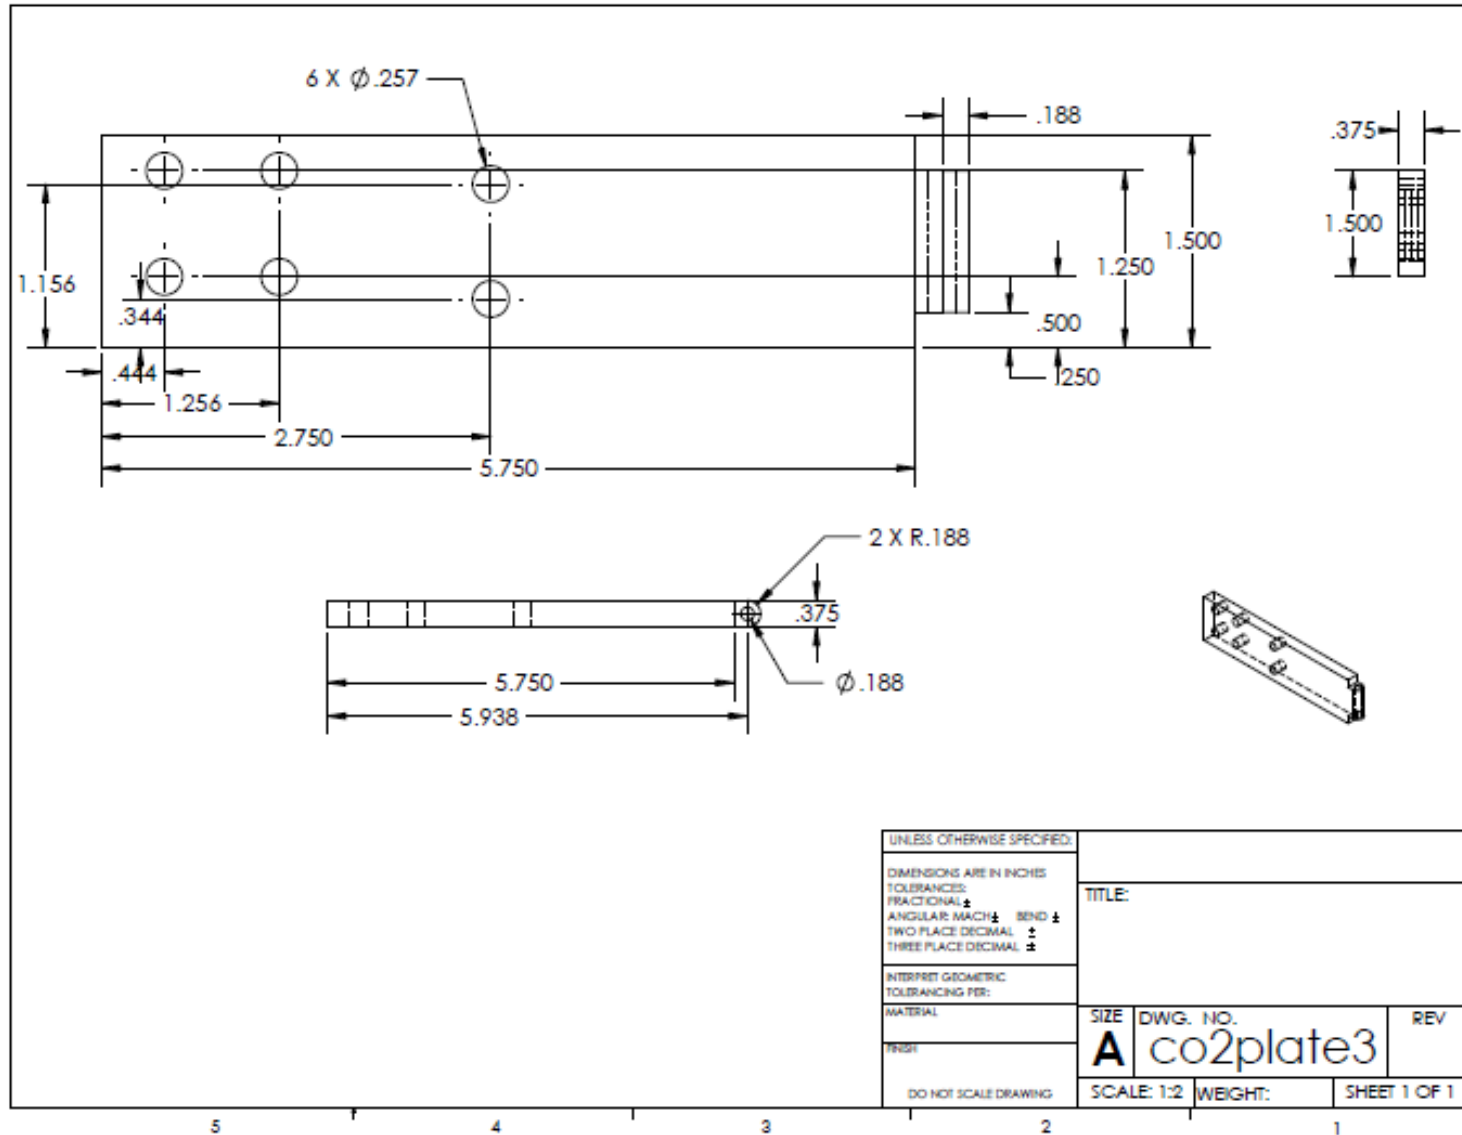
Engineering drawing of the supercritical CO₂ plate #3
